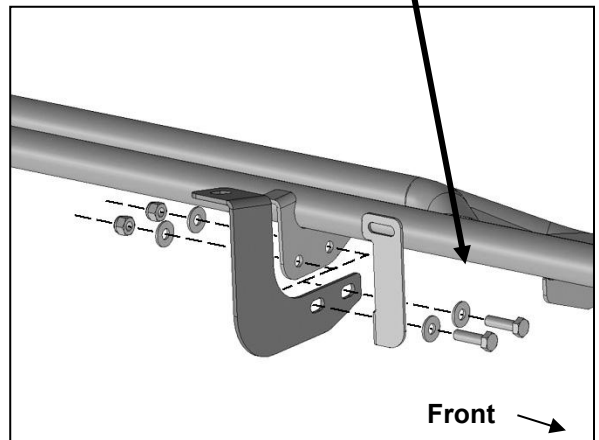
L/R Rear Mounting Brackets and (2) driver/left Support Brackets
